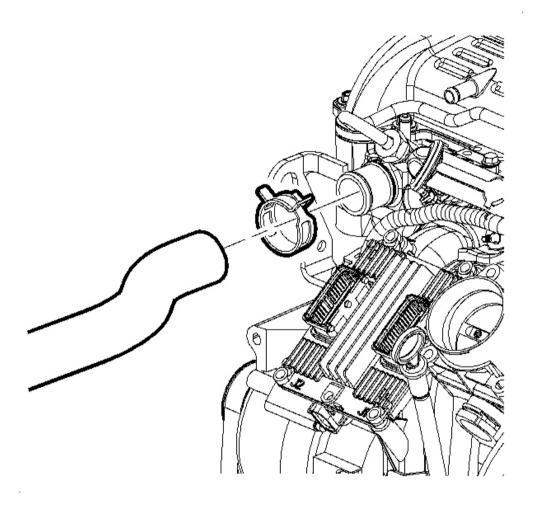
View Of Radiator Inlet Hose Clamp Courtesy of GENERAL MOTORS CORP.
